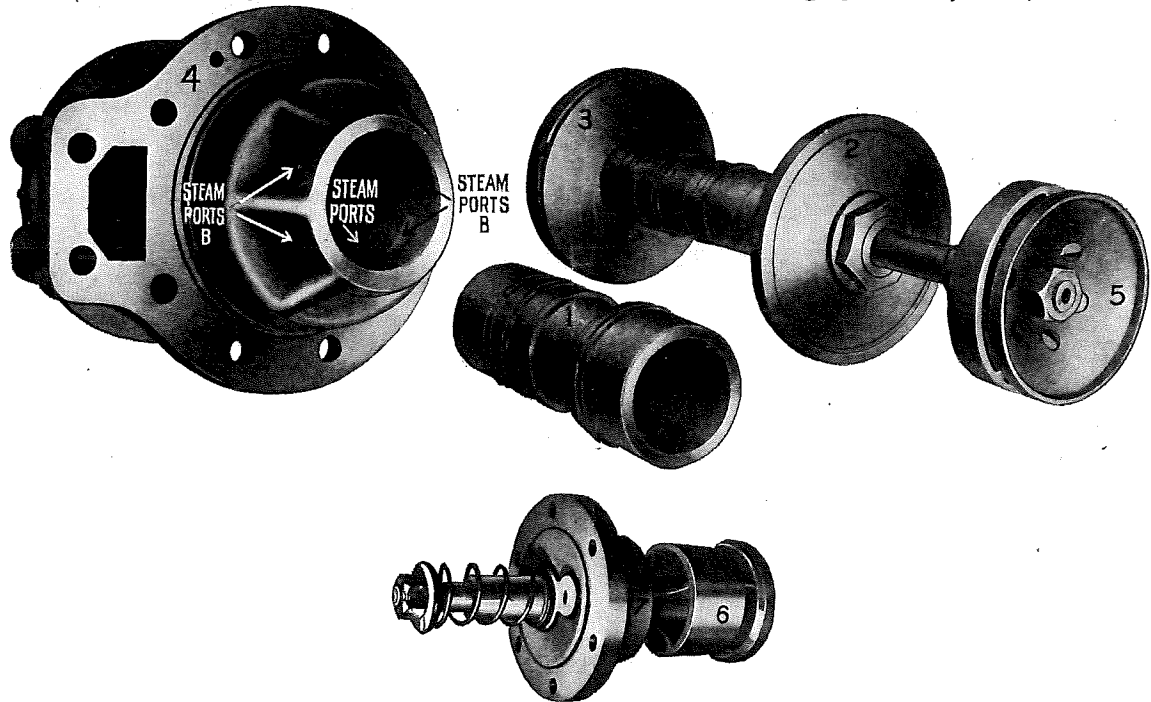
PARTS OF THE INTERCEPTING VALVE
